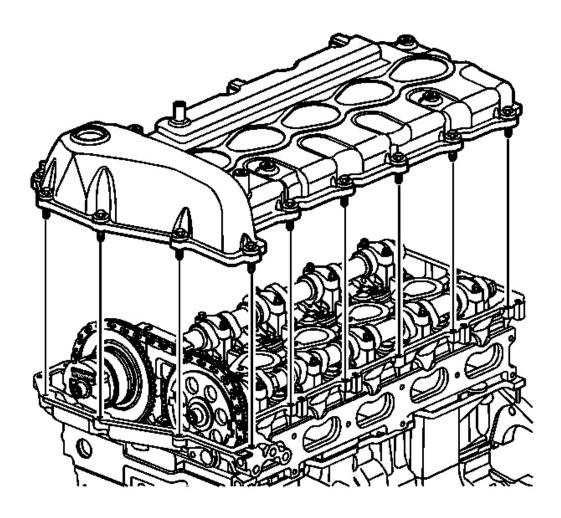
View Of Camshaft Cover Courtesy of GENERAL MOTORS CORP.
